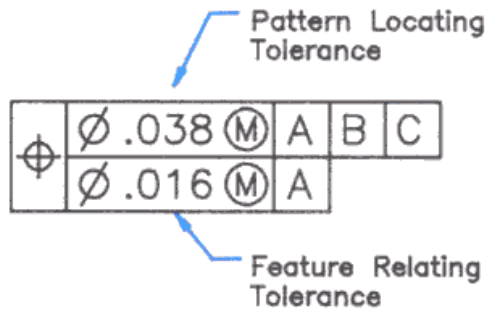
The feature control frame for a composite position tolerance includes a pattern locating tolerance and a feature relating tolerance.
